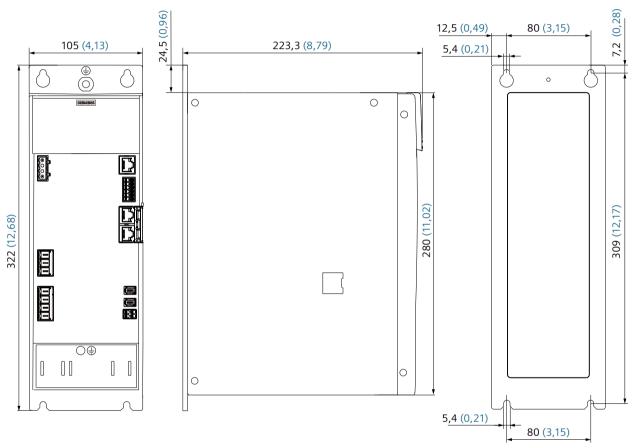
Dimension drawing SINAMICS S210 FSC, 3 AC, dimensions in mm (inch)
